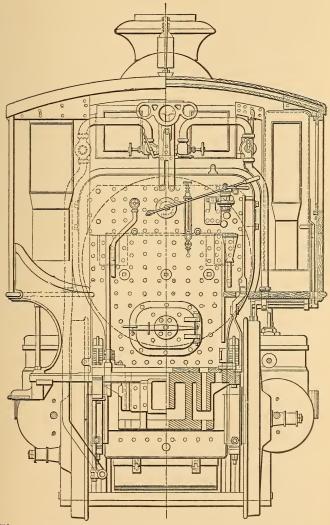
Rear View, and Part Section through Cab, Pennsylvania R. R. Engine, Class "O."
